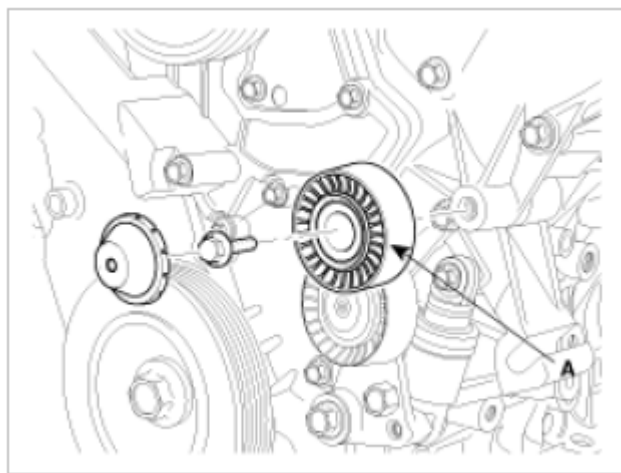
Identifying Drive Belt Auto Tensioner And Mounting Bolt
